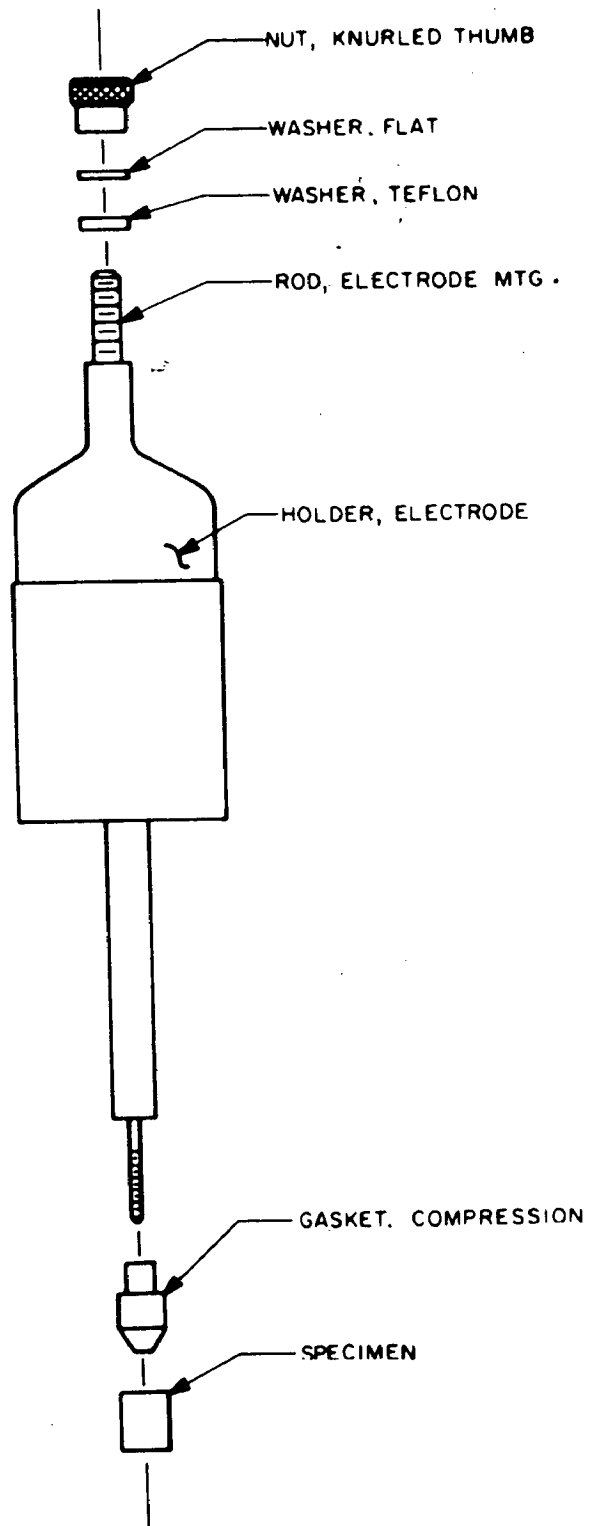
SPECIMEN HOLDER ASSEMBLY
